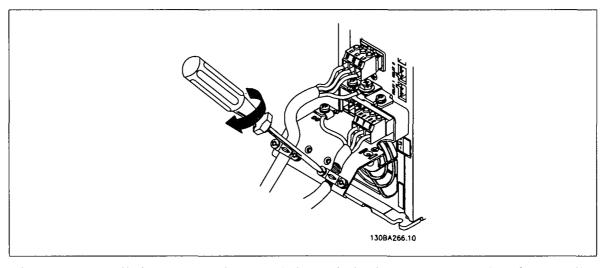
Mount cable clamp to ensure 360 degree connection between chassis and screen, note the outer insulation of the motor cable is removed under the clamp.
